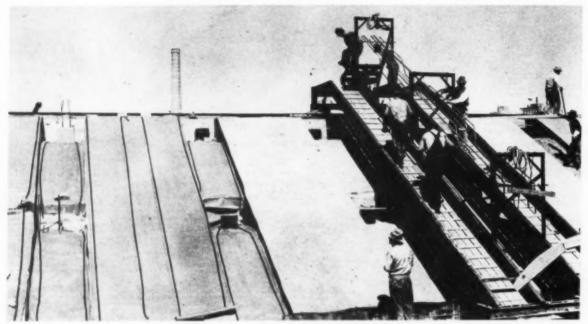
GALVANIZING KETTLE fabricated by arc-welding on the job.
